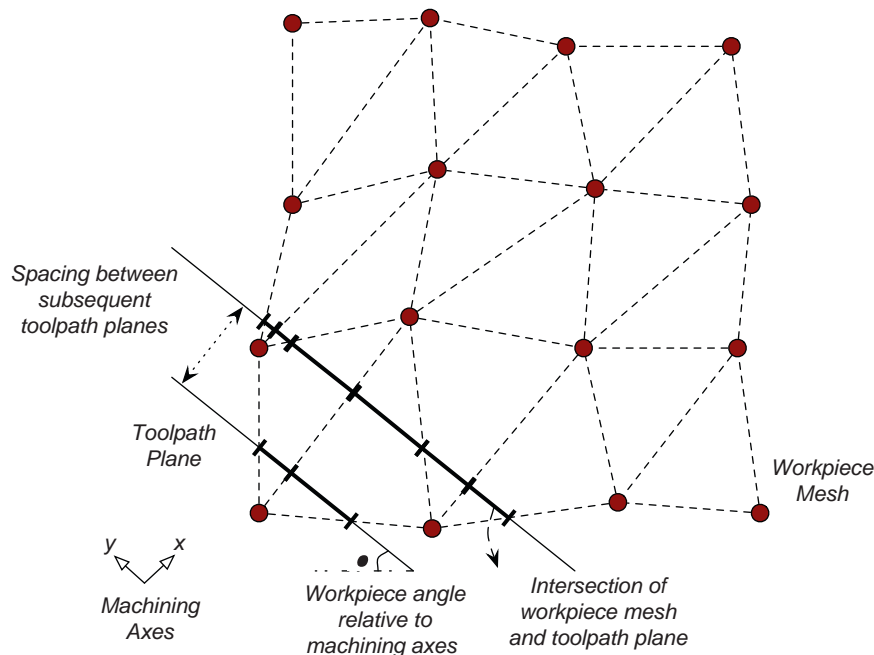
Schematic of toolpath plane-workpiece intersection.
